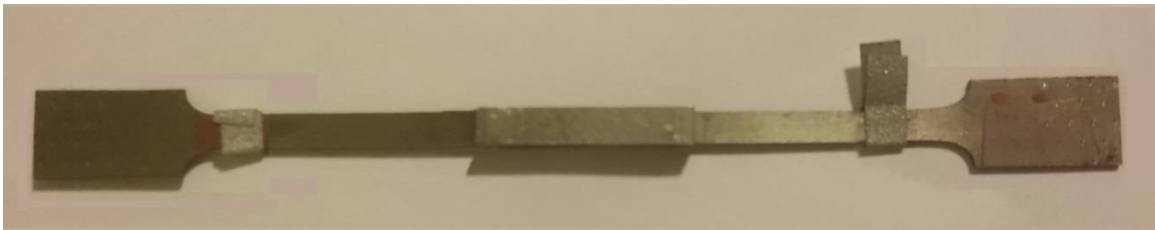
Weld 9 (NiTi-stainless) tensile specimen with backing strip attached.
